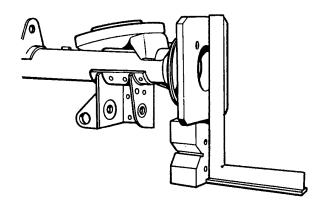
Checking Rear Axle Beam for Vertical Deformations with Angle Gauge Applied to Outer Face of Flange A.70172
